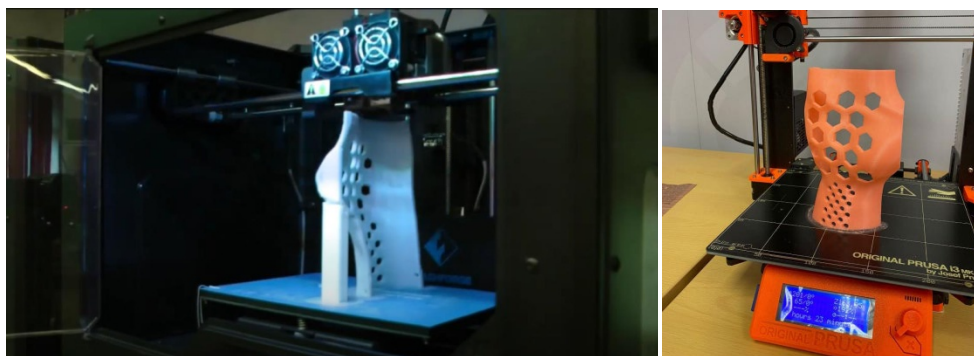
3D printing of orthosis using FlashForge Creator Pro machine (left), 3D printing of orthosis with Prusa machine (right)
